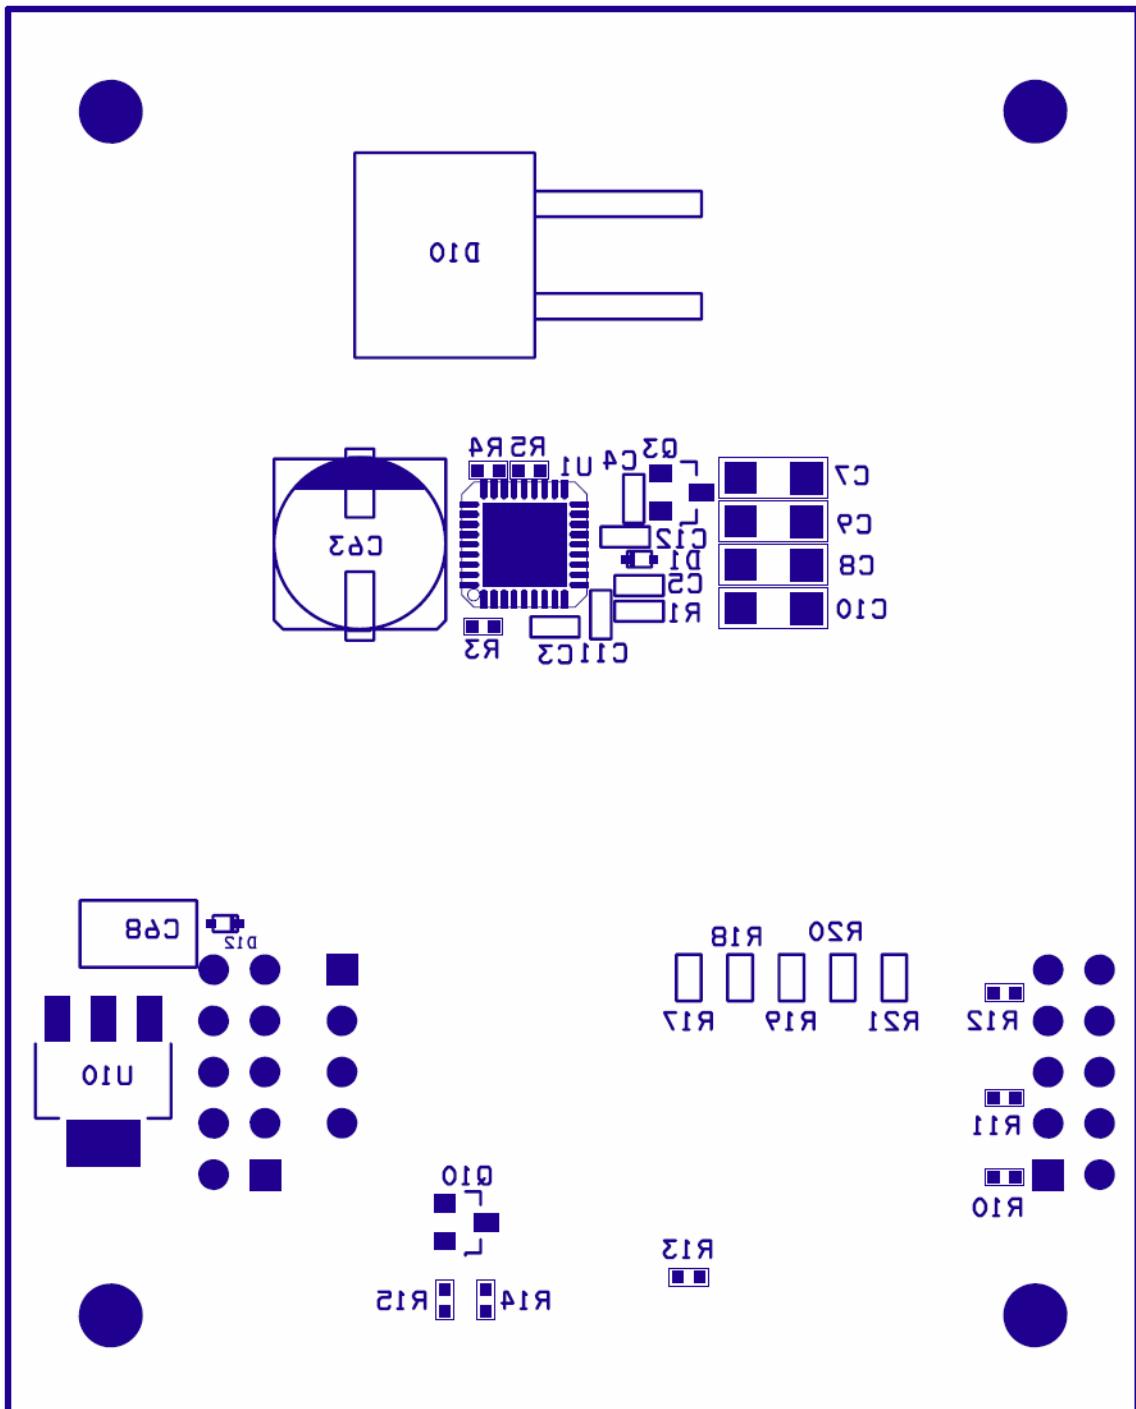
PCB – Silk Screen Bottom (Top View - reversed)
